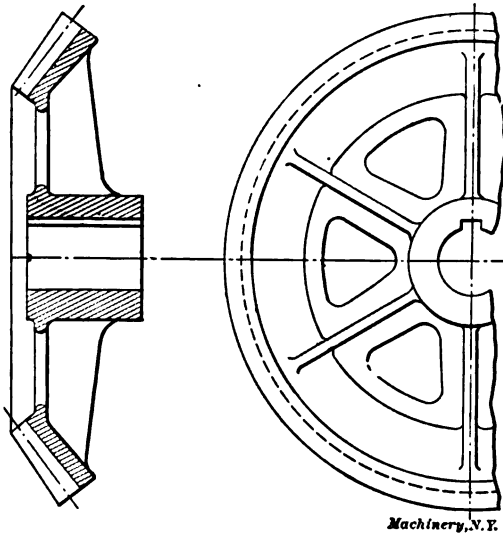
T-arm Style of Bevel Wheel for Heavy Work
